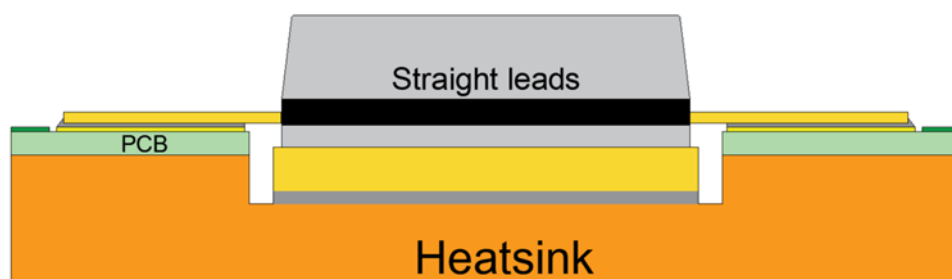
PCB bonded to a heat sink with a cavity, intended for straight leads package
